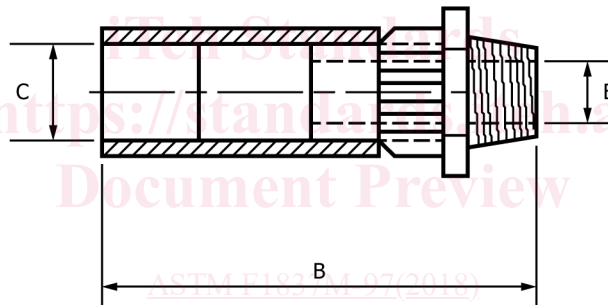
Type II-Single-Legged Threaded Cable Entry Seals
